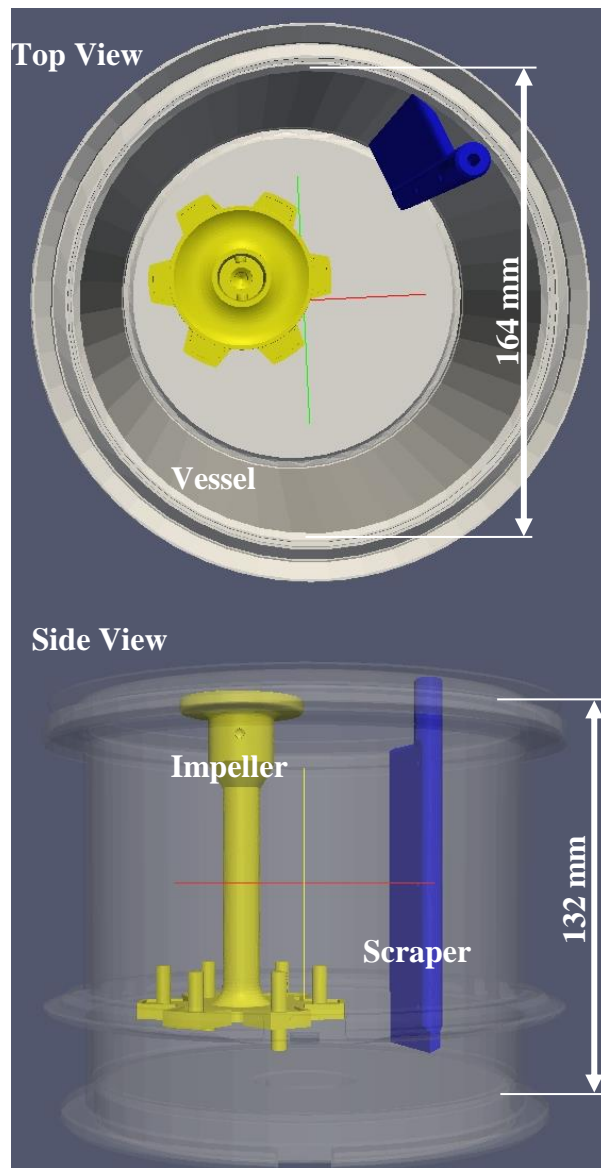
Top view and side view for the vessel, impeller, and scraper of Eirich mixer.
